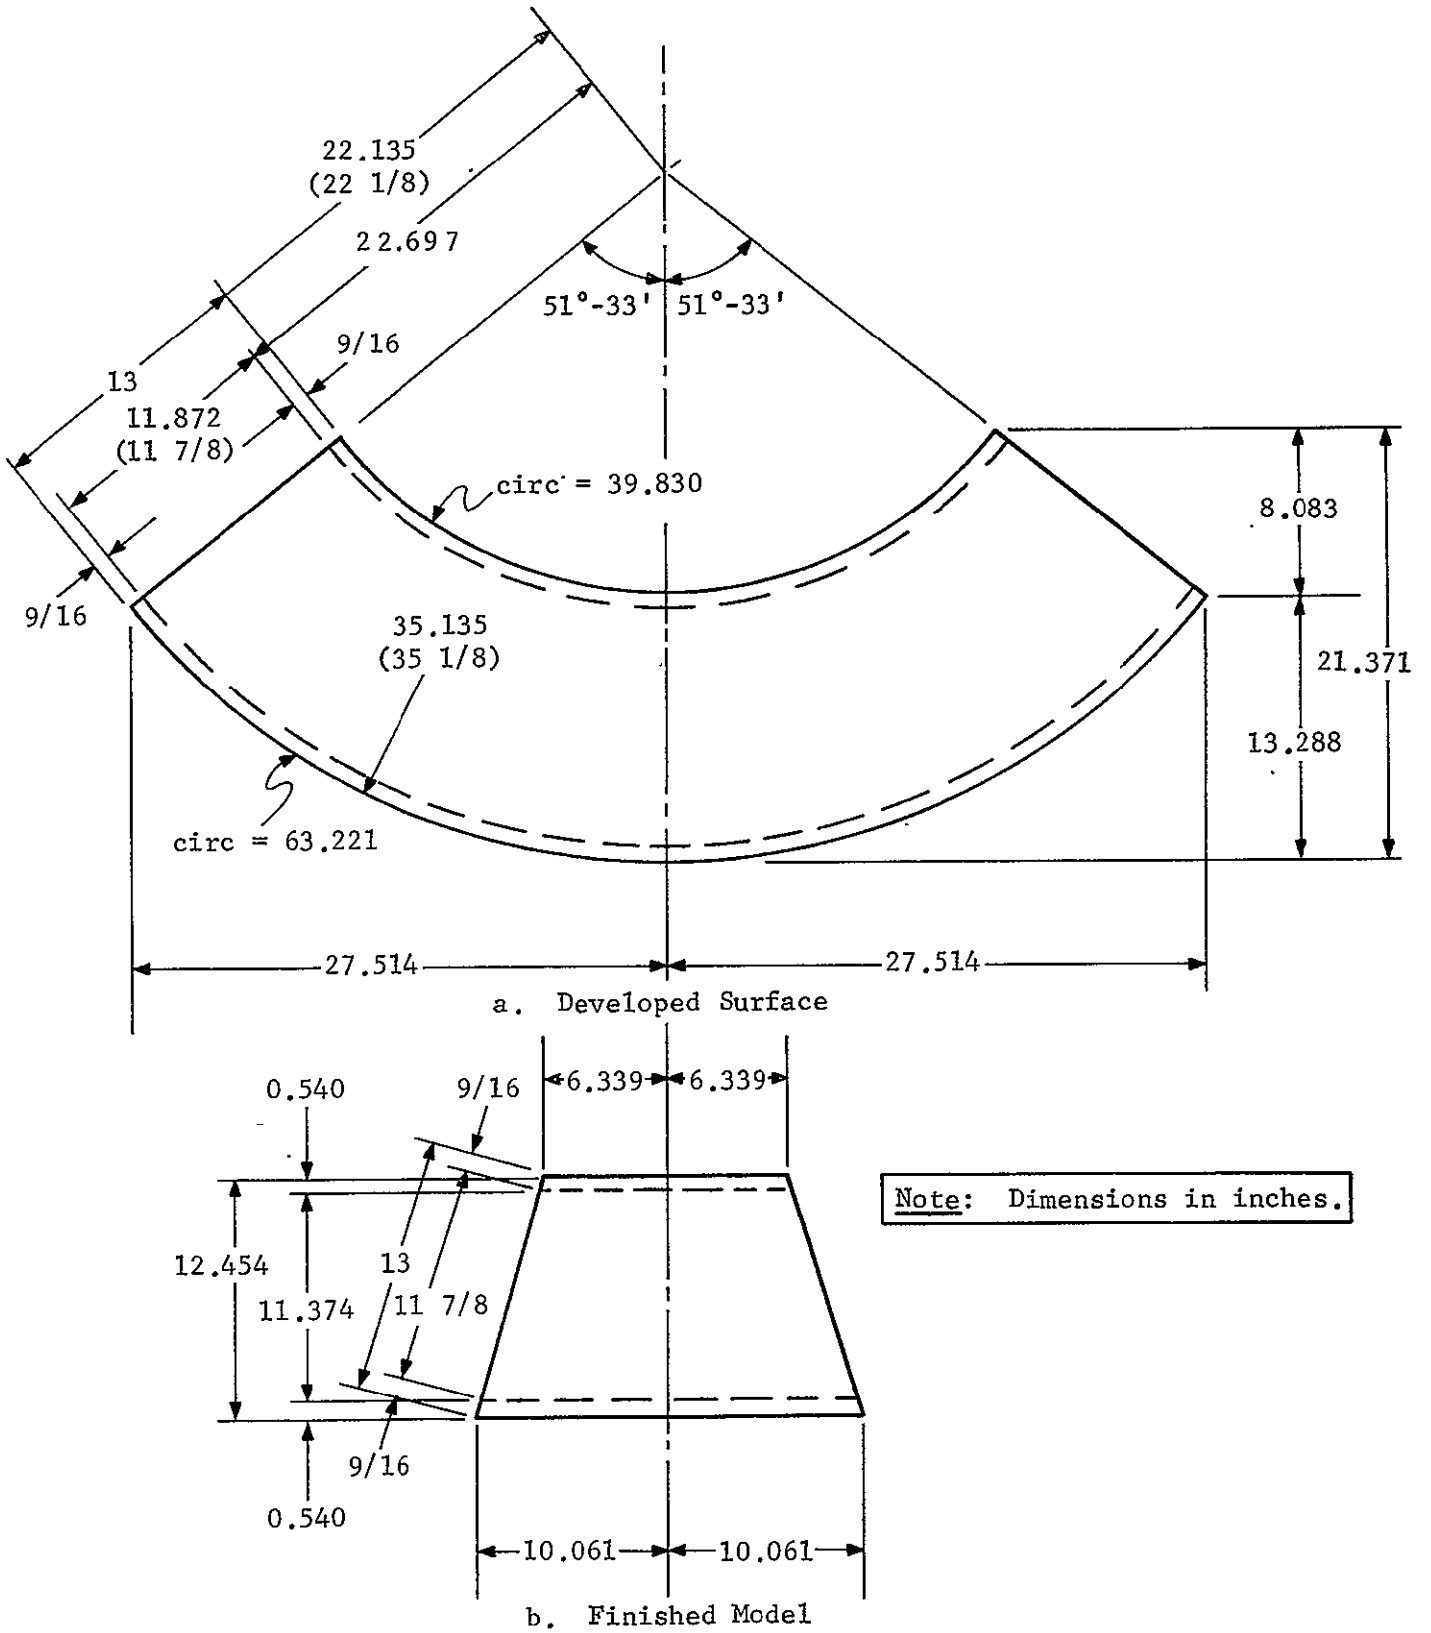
Details of Cone C Dimensions and Developed Surface
